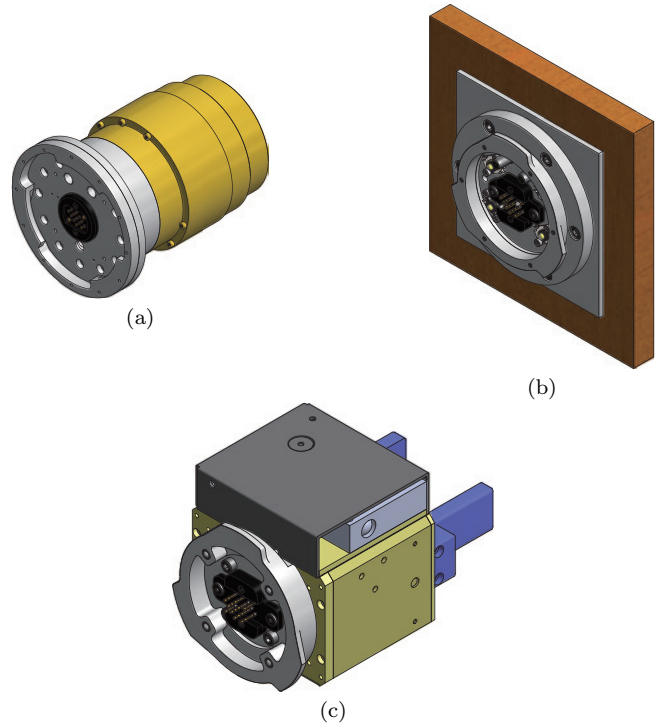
The view of design: (a) attachment, (b) fixture (wall side), (c) fixture (gripper side).
